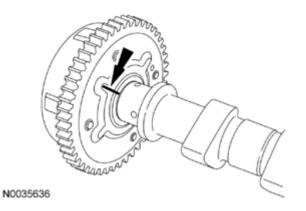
Identifying Sprocket And Camshaft Reference Mark Courtesy of FORD MOTOR CO.
